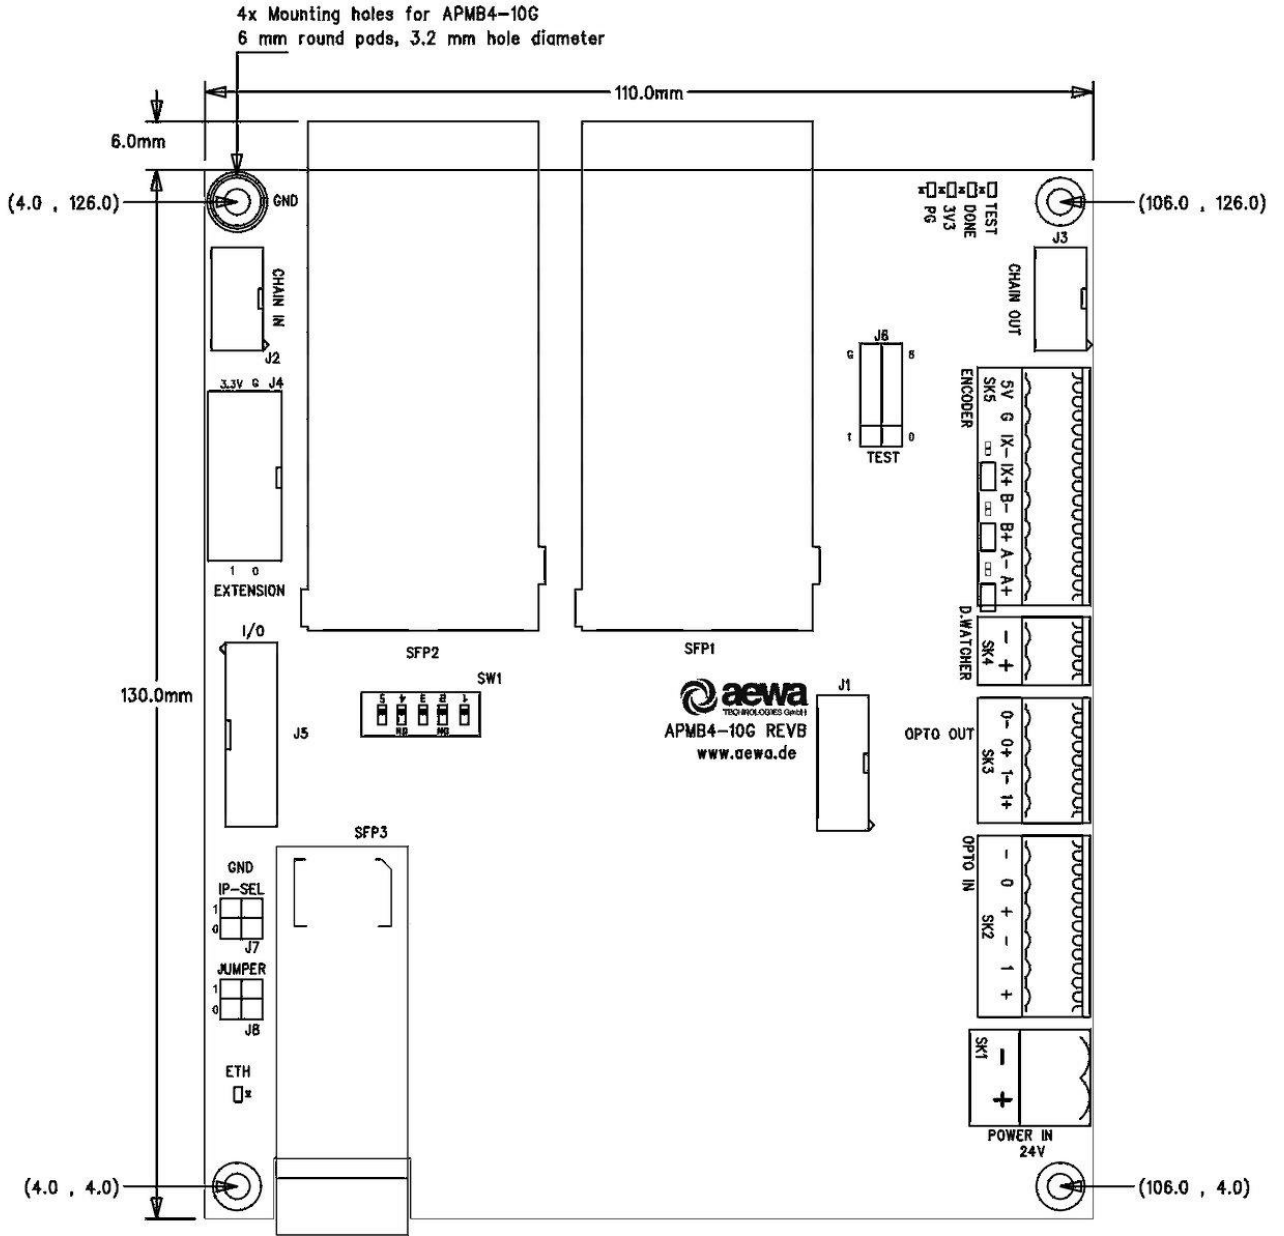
APMB4-10G MECHANICAL DIMENSIONS
